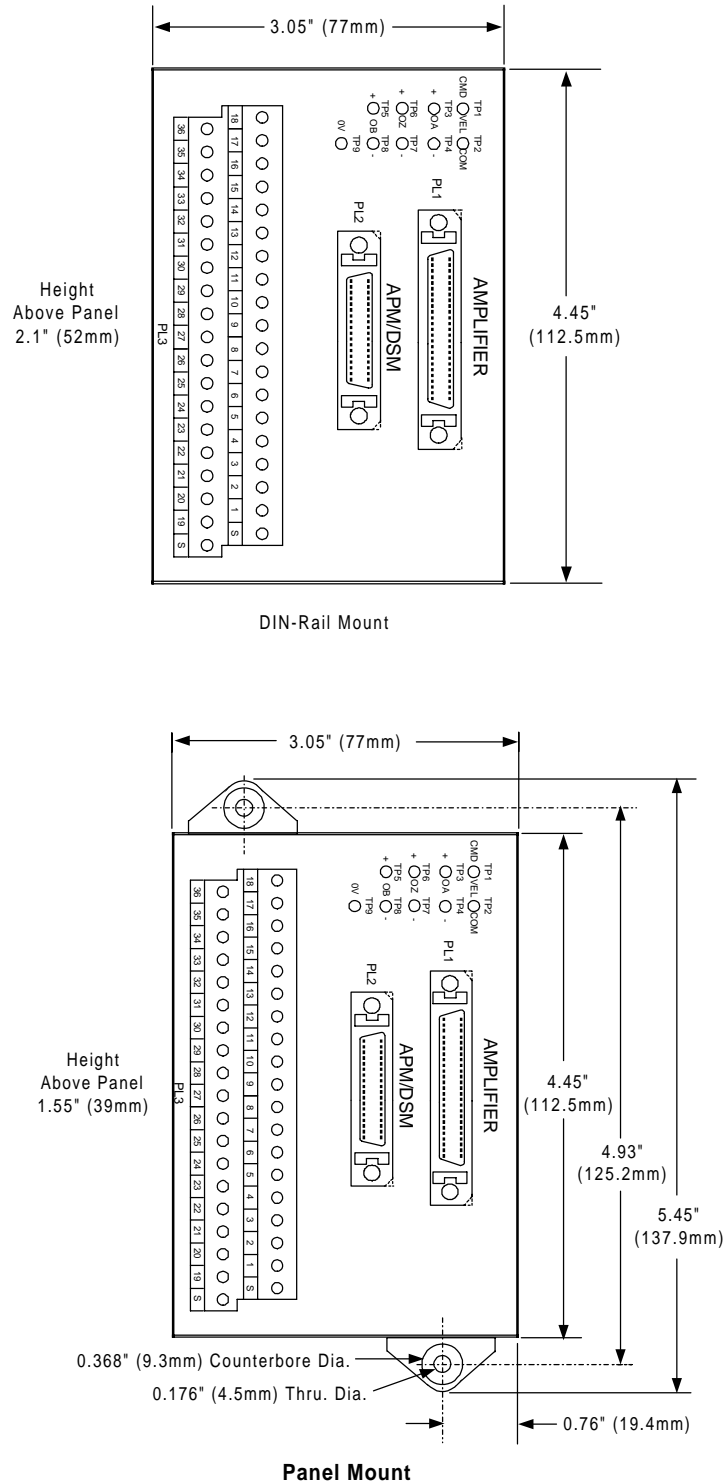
IC800SLT001 Terminal Board Mounting Dimensions
